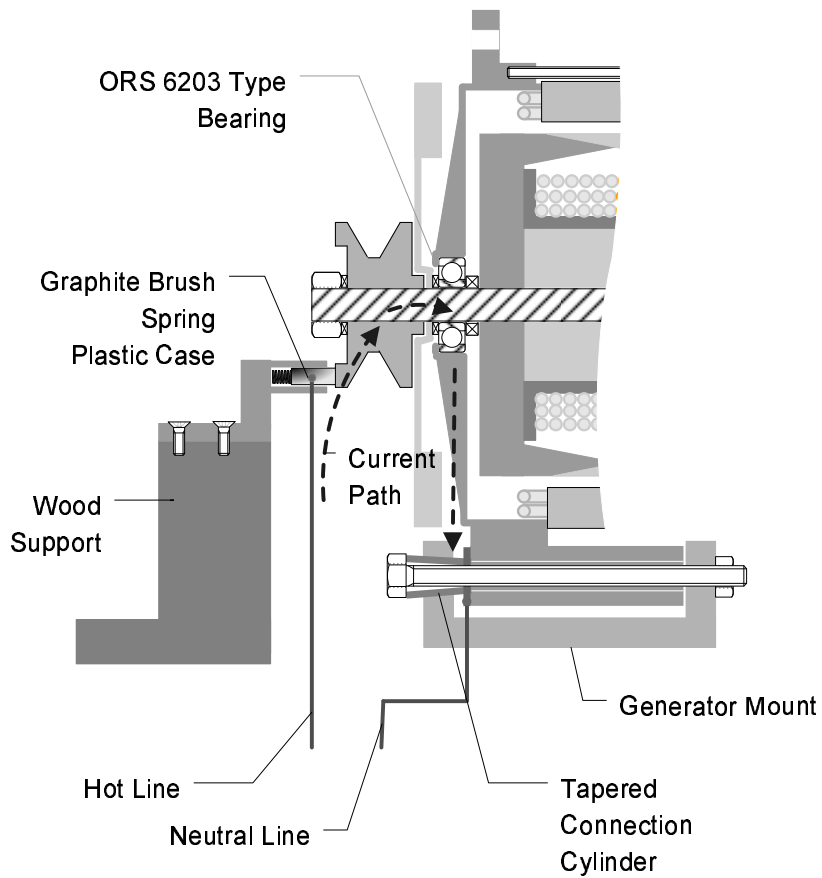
In-situ* bearing damage circuit installation and shaft current path.
